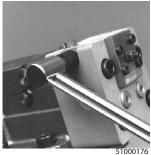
Install HC Control Bleed Valve Seal Nut
